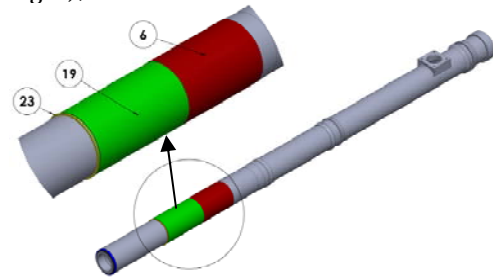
Schematic representation of the outboard bearing and the shielding sleeve mounting
